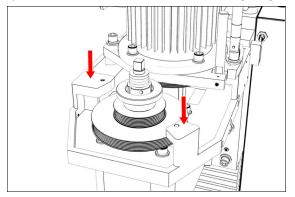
Power Drawbar mounting surfaces inside of the spindle motor cabinet.
